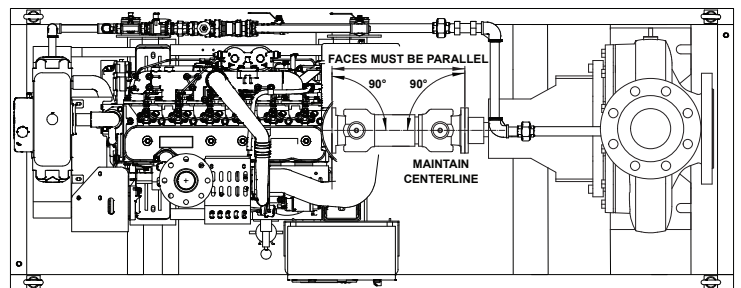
DIESEL ENGINE DRIVESHAFT
